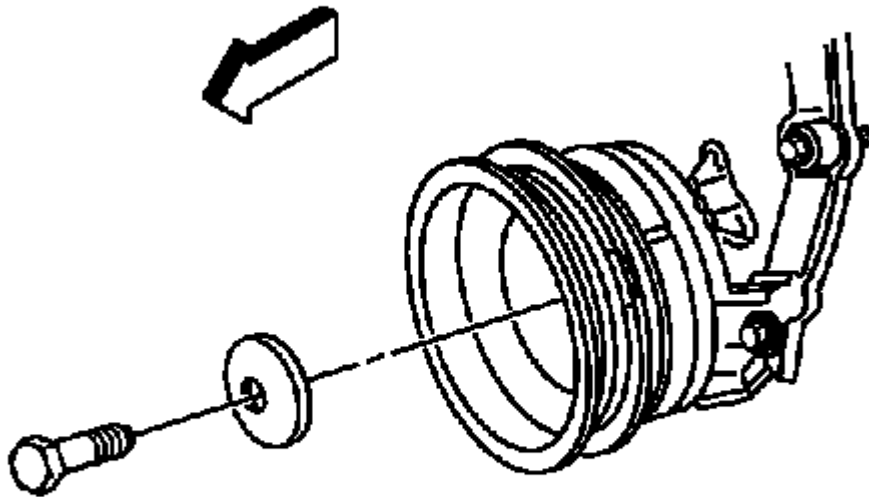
View Of Crankshaft Balancer Washer & Bolt
